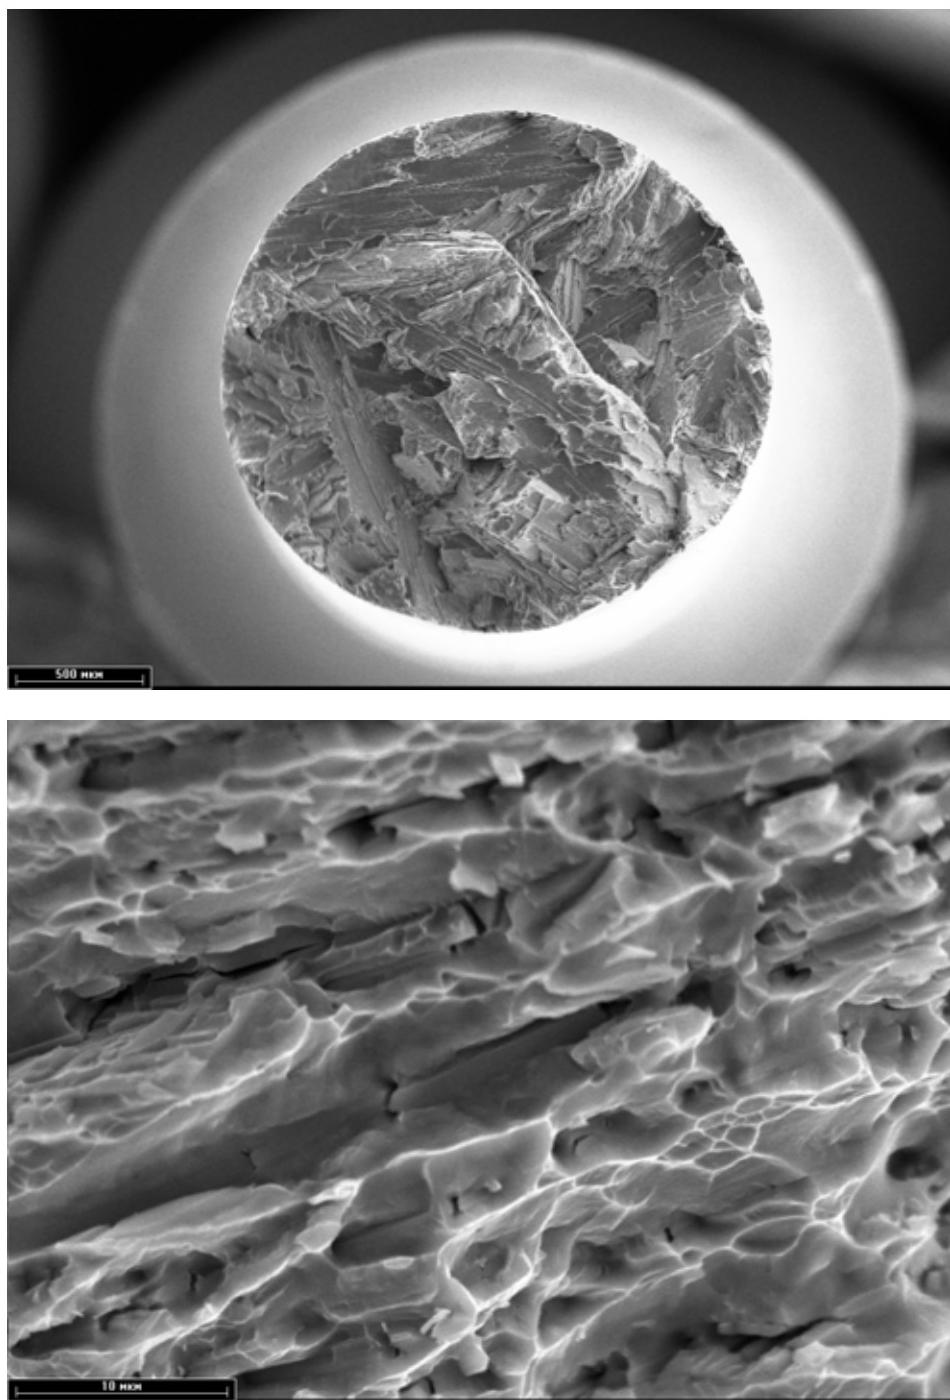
Fracture surface of 1.1 specimen (as-cast condition).
